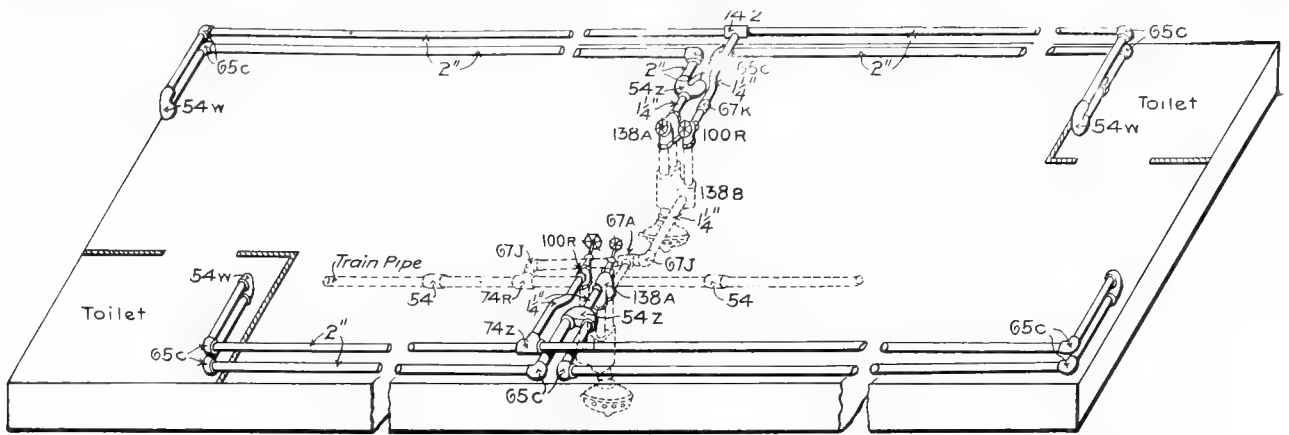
Arrangement of Piping for Standard Direct Steam System with Two Traps No. 138.
